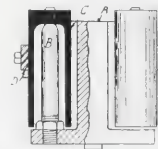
JIG FOR HOLDING SHELLS ON PLANNER
